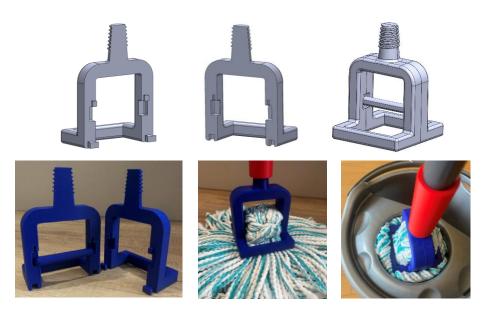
Third prototype version: updated CAD model and 3D-printed result
